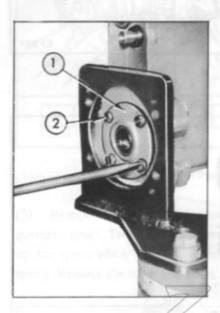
Disassembly drawing of the fuel injection pump proper
